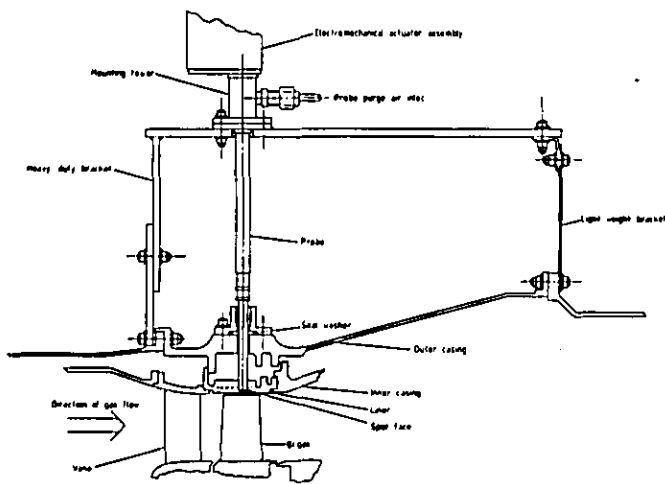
The installation design for the mini SMP in FSS with the heavy and light weight brackets used to match probe thermal growth to that of spool casings.
